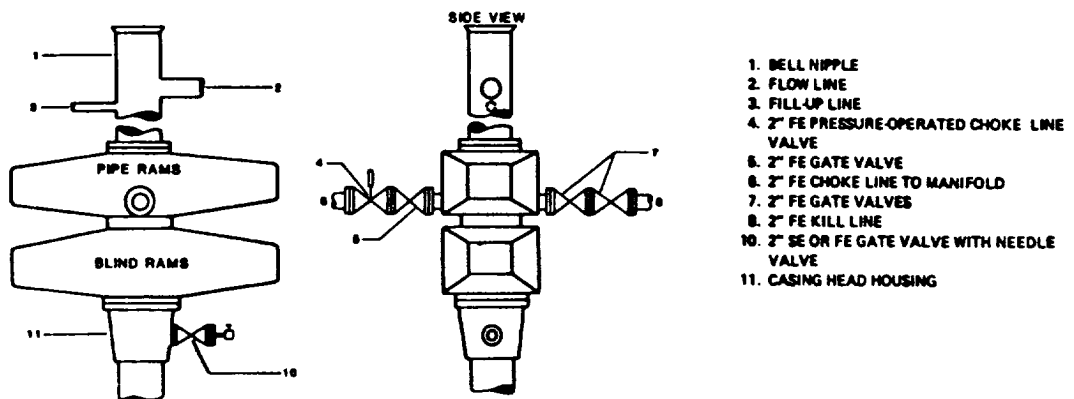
Standard Hydraulic Blowout Preventer Assembly
